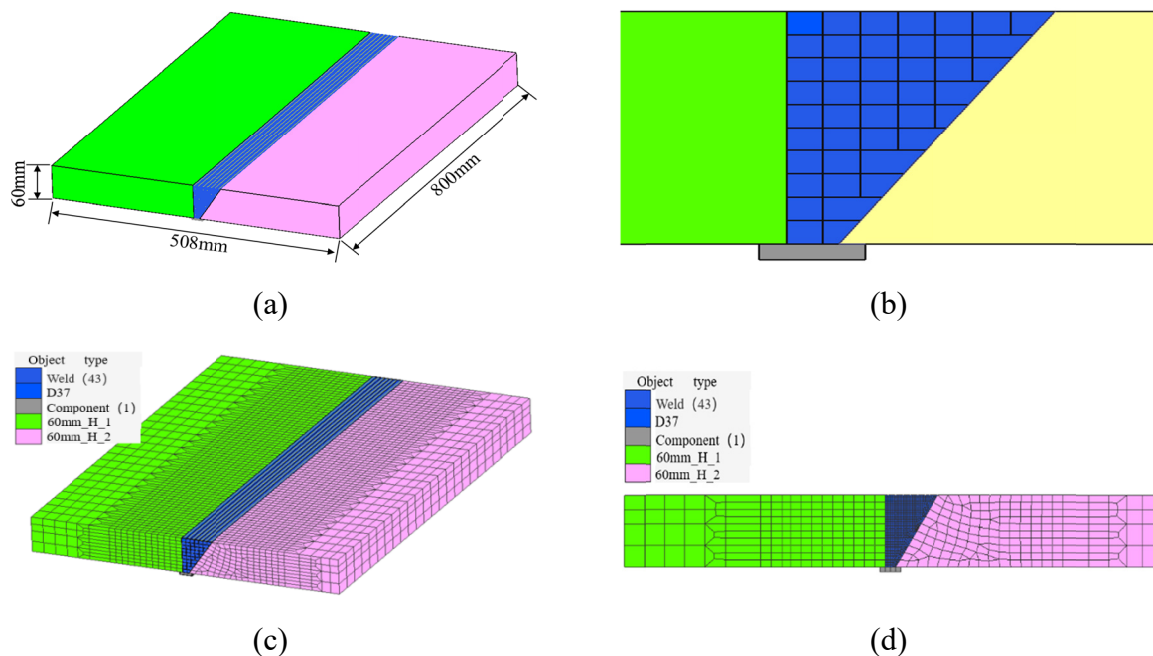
Finite element model establishment: (a) Geometric model, (b) distribution of the weld pass, (c) overall model mesh, (d) weld mesh
